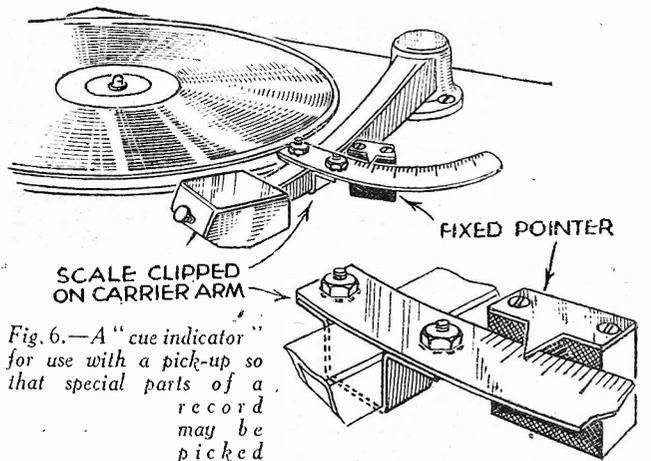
A “cue indicator” for use with a pick-up so that special parts of a record may be picked out.
